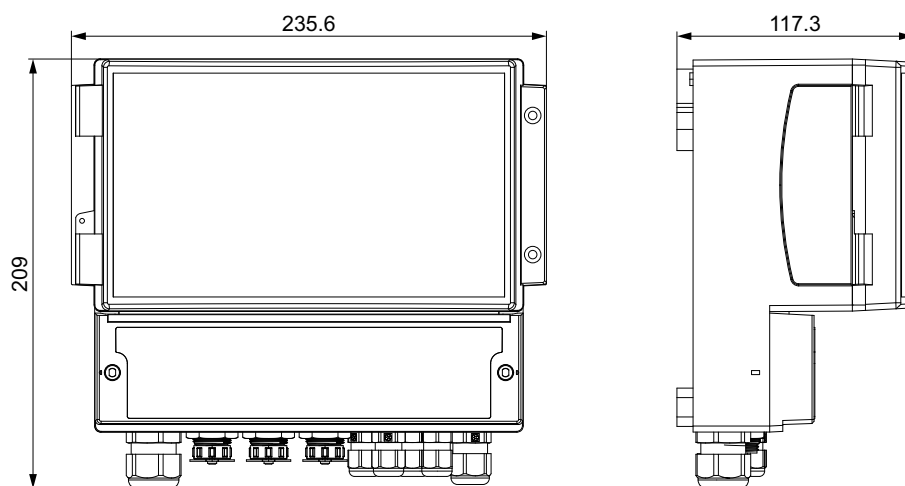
Dimensions of CU 382 control unit, front and side view (in mm)
